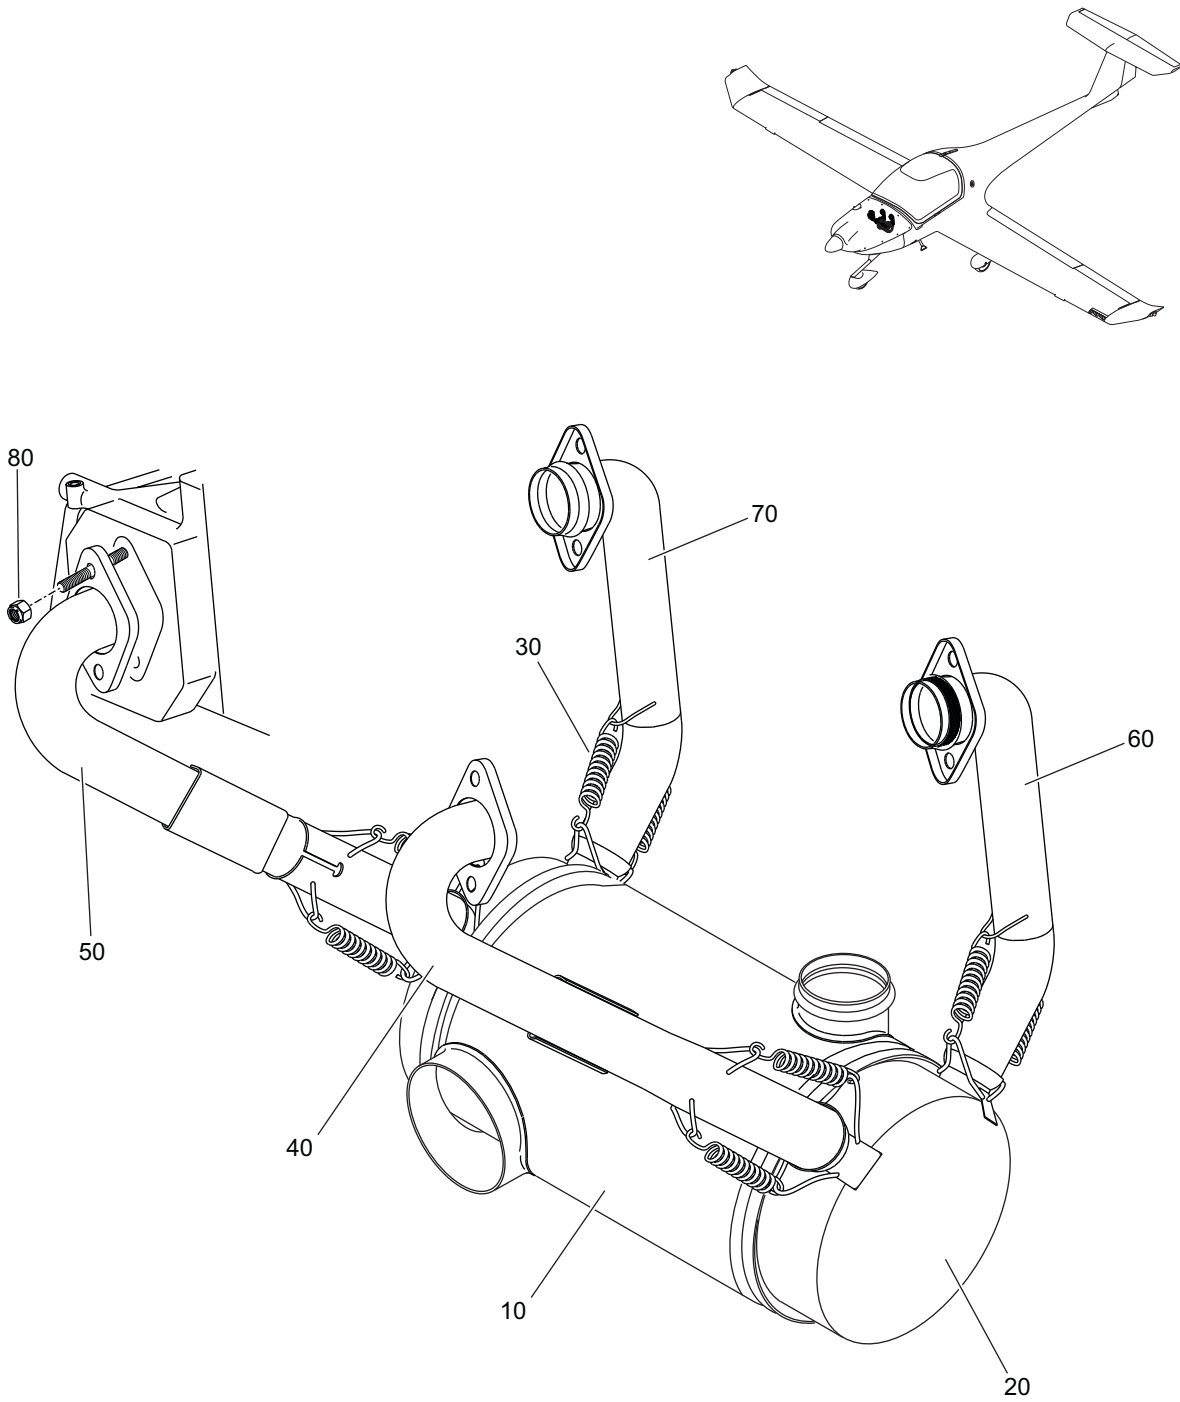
Heggemann Exhaust System Installation - ROTAX 912S3
